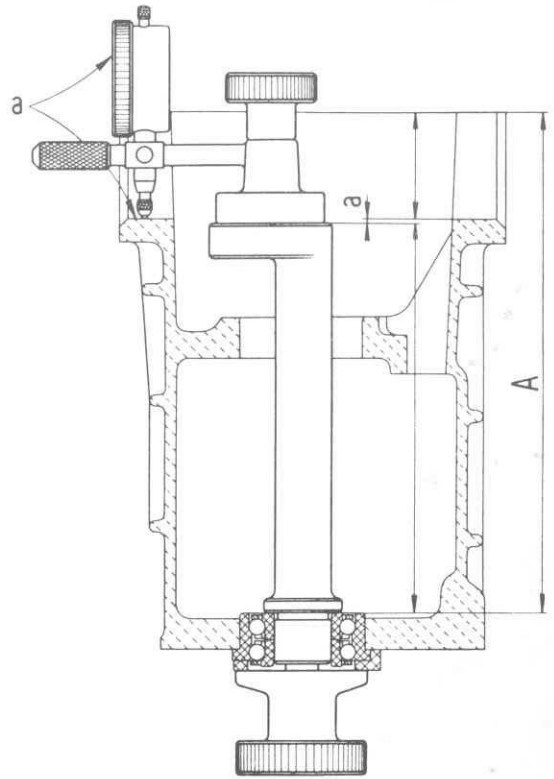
8 How tool A.70036 is set up so that dial gauge A.95690 can be used to determine the value of 'a' (see FIG 6:6)
